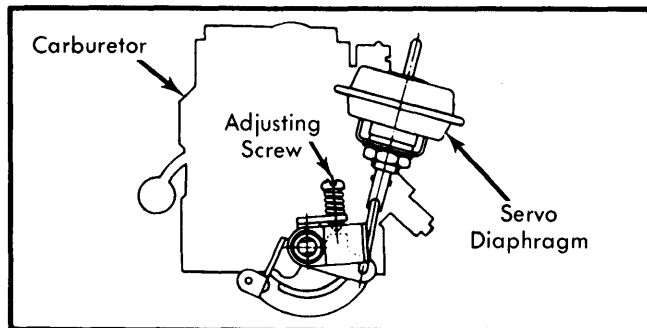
View Showing Location of Servo Diaphragm Adjusting Screw
